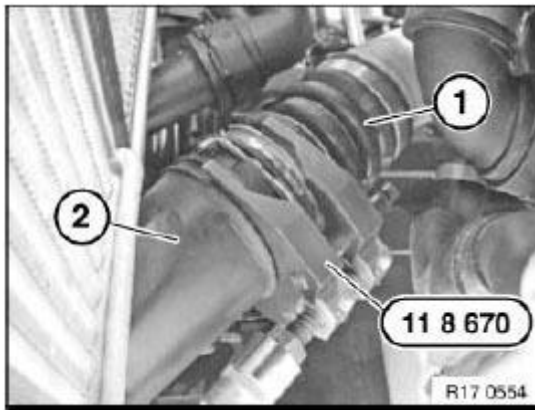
Identifying Charge-Air Duct And Intercooler With Special Tool 11 8 670
